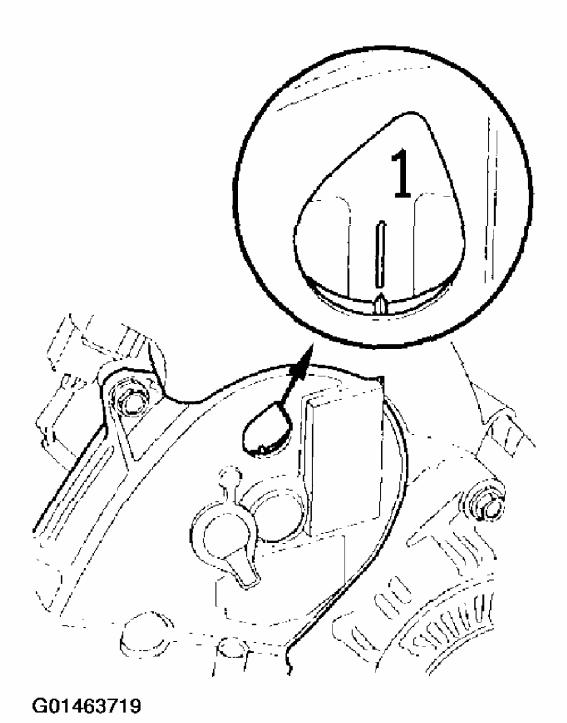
Checking The Camshaft Pulley Marks (Front Camshaft Pulley) Courtesy of AMERICAN HONDA MOTOR CO., INC.
